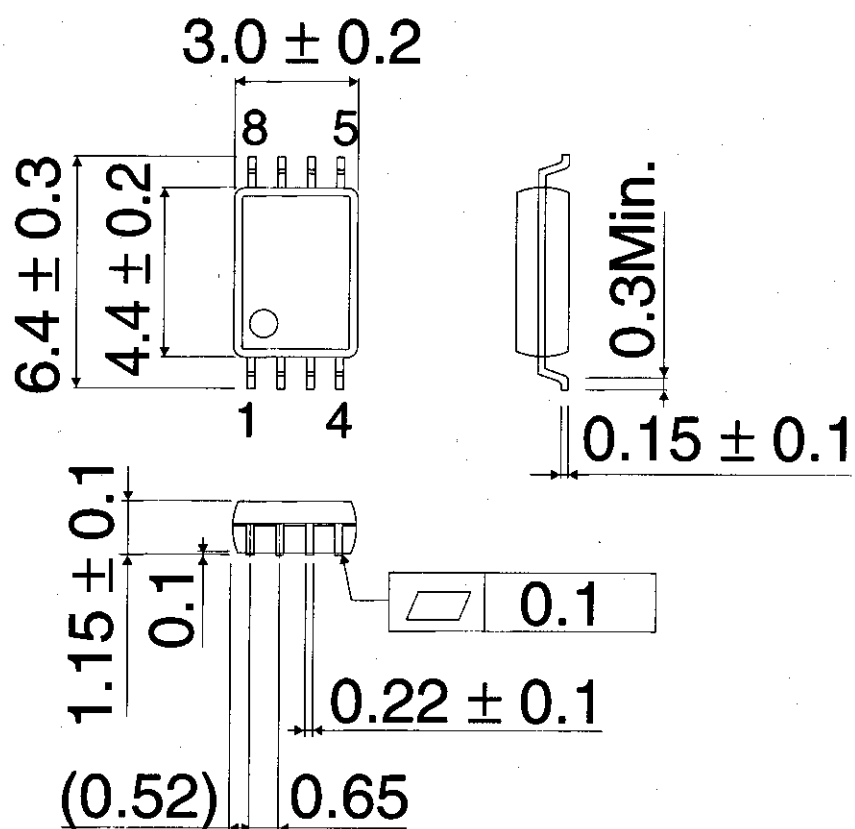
Outline Dimensions SSOPB8(BR9020RFV-W)
